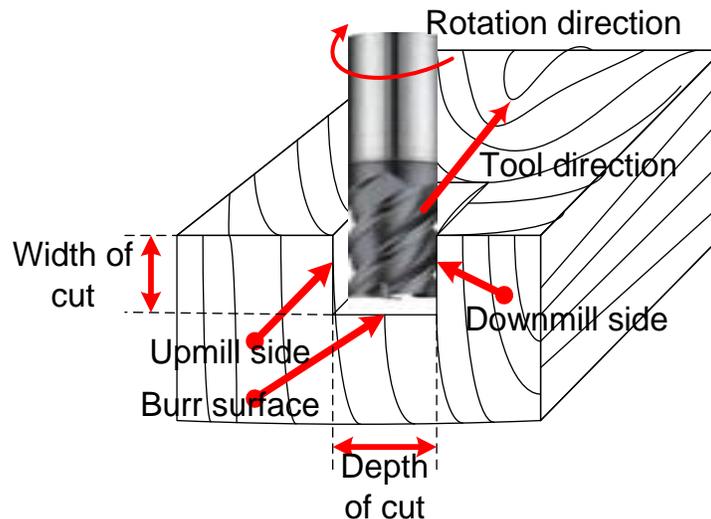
Illustration of spindle and work piece for CNC router in buried cut
